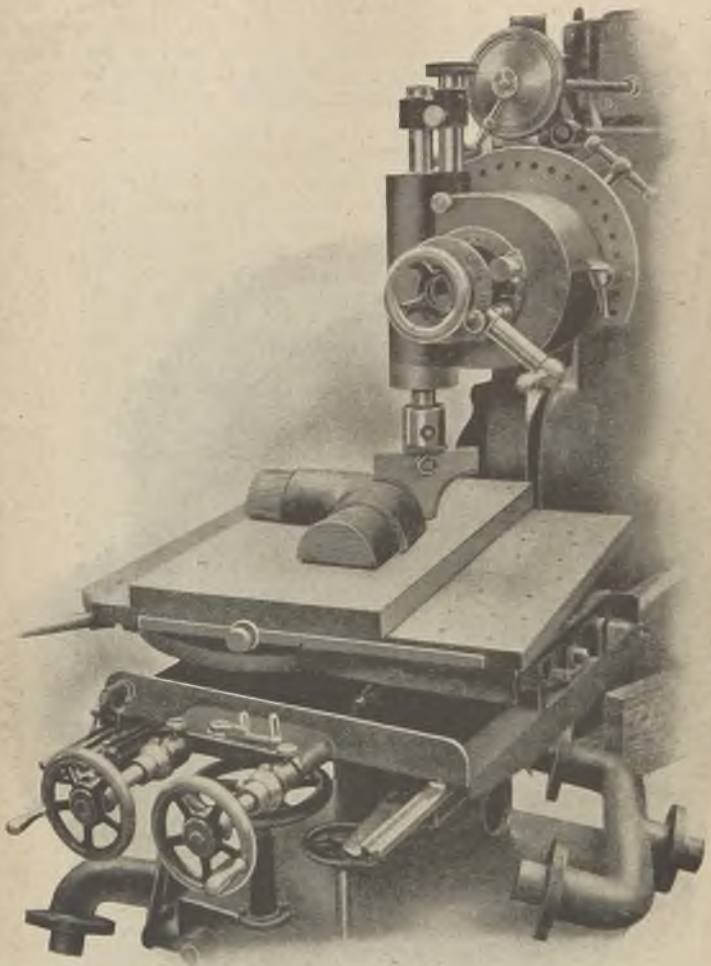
ANOTHER VIEW OF THE MACHINE SHOWN IN FIG. 3.
